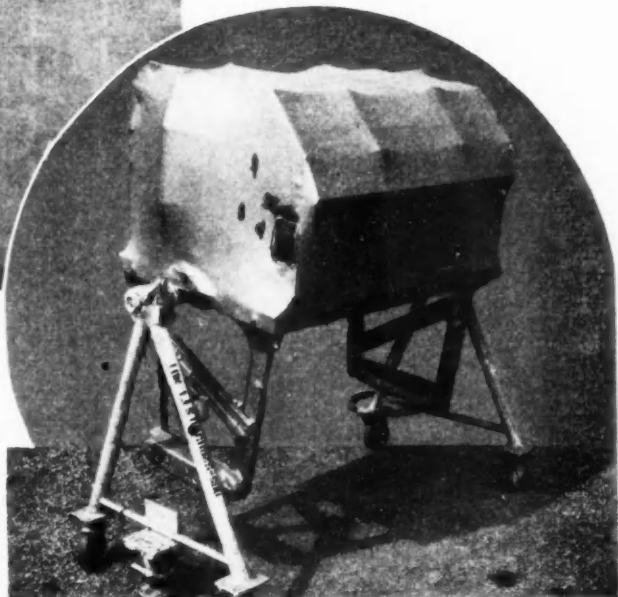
(Right) A typical assembly jig to which the first coating of strippable plastic has been applied over the tape and webbing agent.
